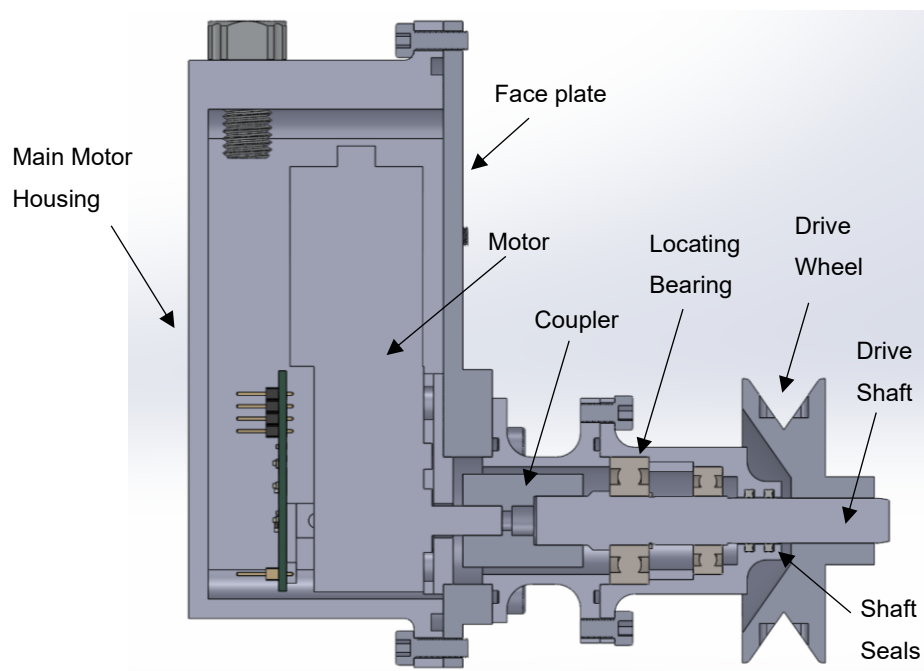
Cross section of the sealed motor housing and bearing arrangement with main components labelled.
